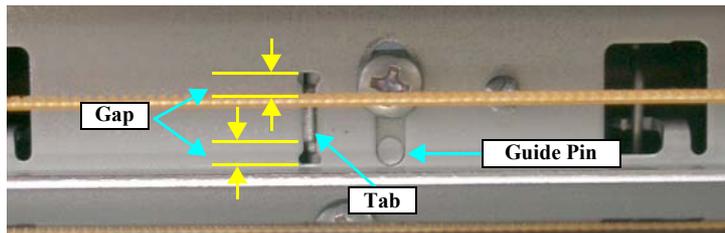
Checking the Position of Tab on the Guide Roller LD
